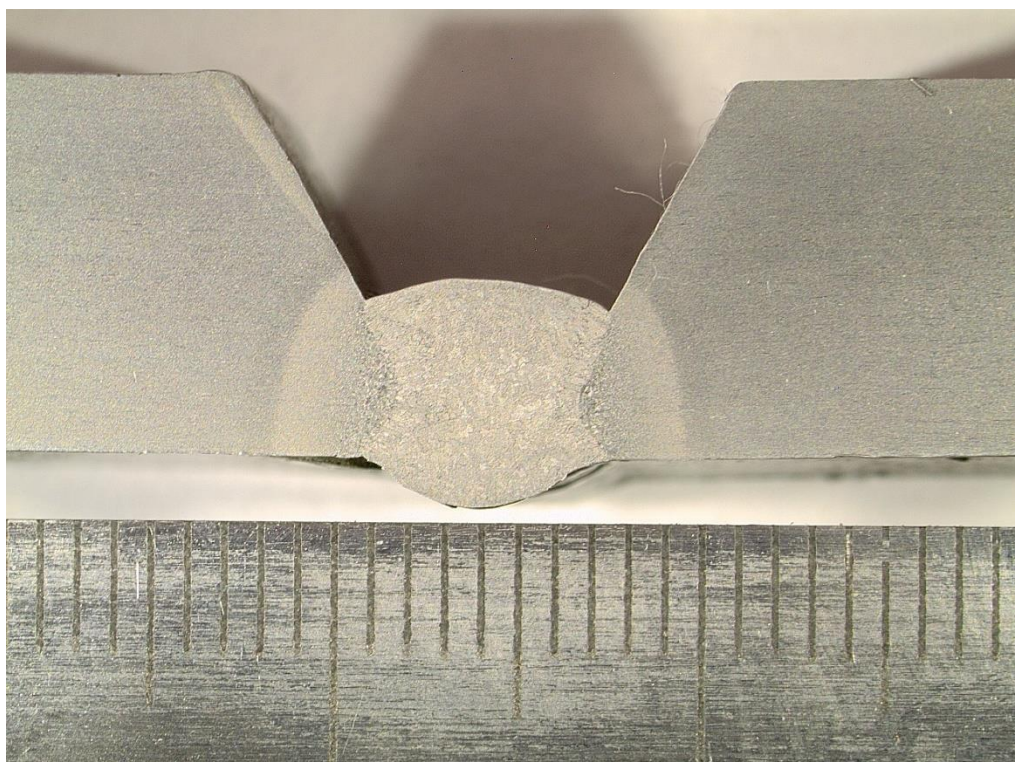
The macrostructure of the weld metal (root layer) : a rectangular alternating current with a high frequency magnetic field
